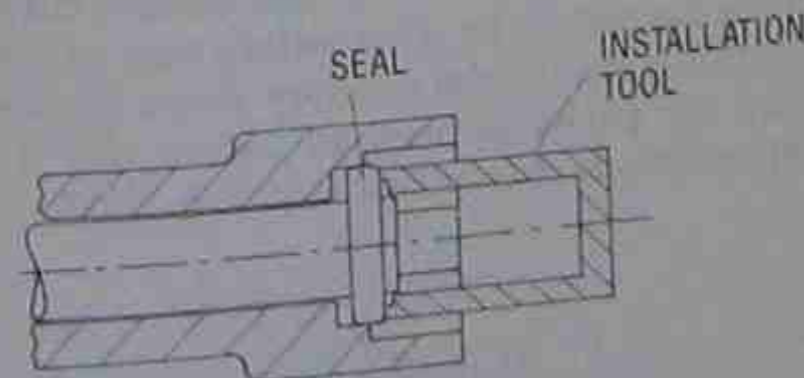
Use the correct tool to push the seal home into the housing.
